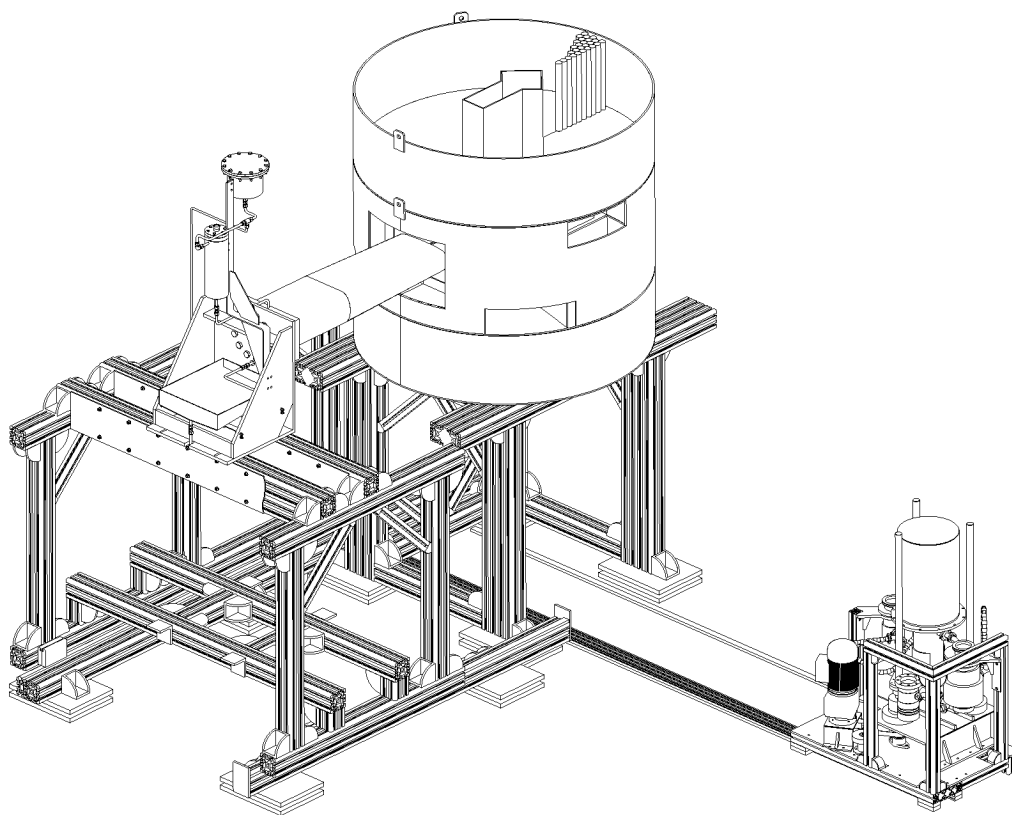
JESSICA Target-Moderator-Reflector Assembly with moderator trolley outside assembly
